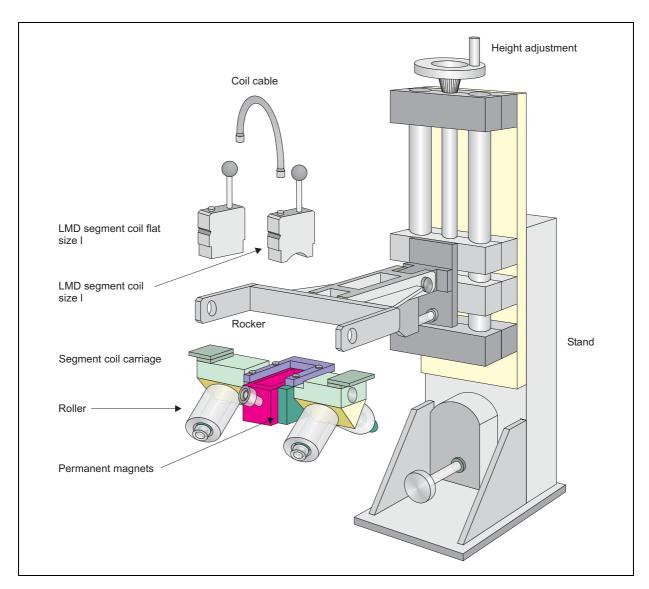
Segment coil carriage PM 2.970.02-2101 with holder 2.870.01-7021
